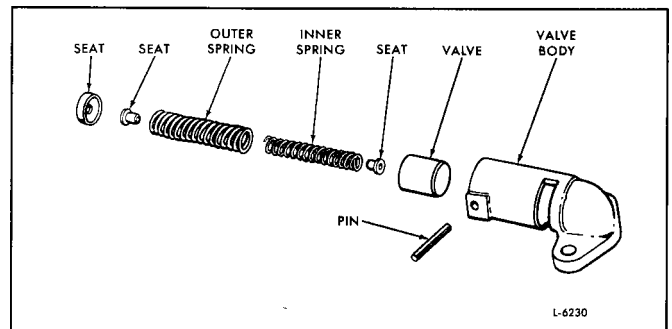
Current Oil Pressure Relief Valve Details and Relative Location of Parts
